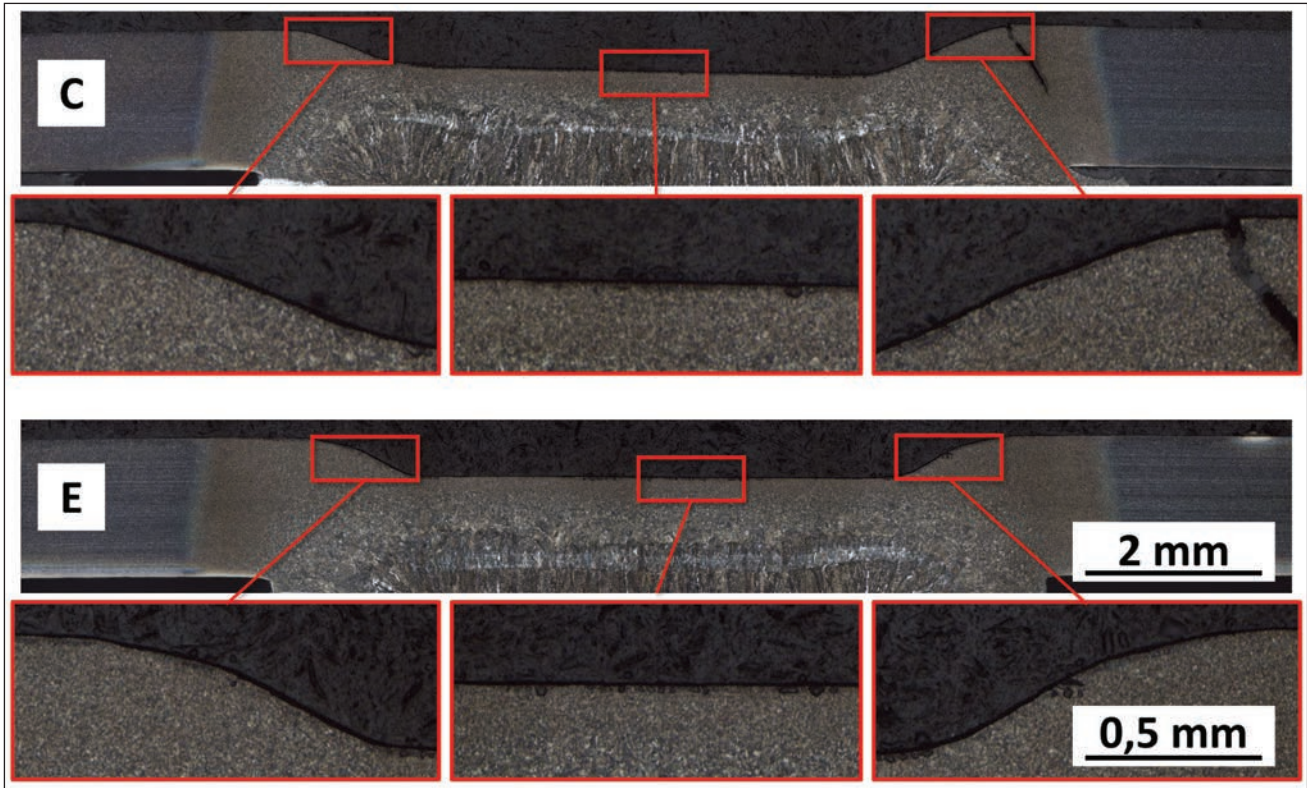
Details in metallographic cross sections for welding processes C and E. Highlighted are the absence of cracks for welding process E and the formation of cracks at the weld shoulder (type C) for welding process C during welding below expulsion.
